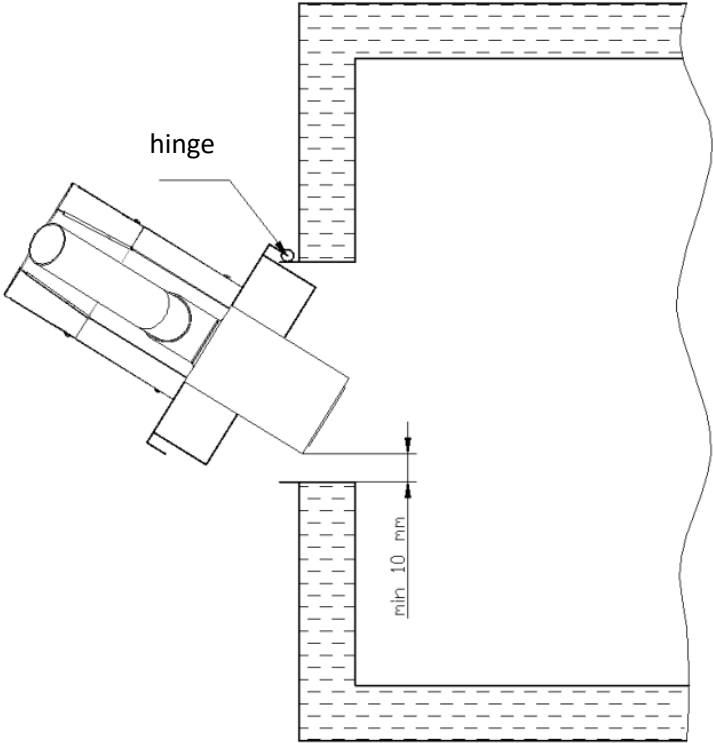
Cross-section view from above of the boiler furnace chamber.
